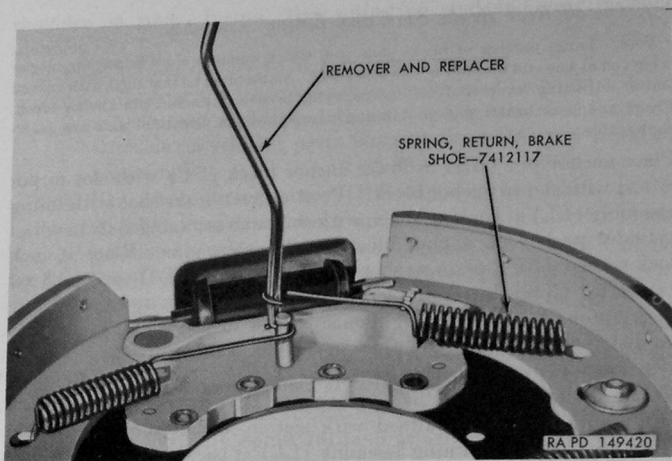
Installing brake shoe return springs with remover and replacer 41-R-2375-20.
